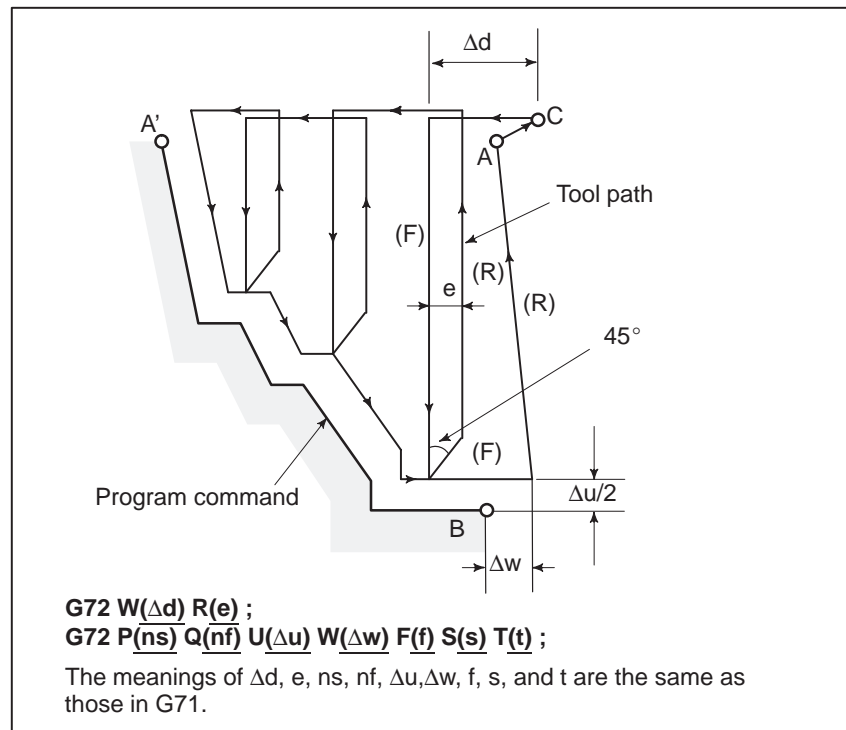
(a) Cutting Path in Stock Removal in Facing
